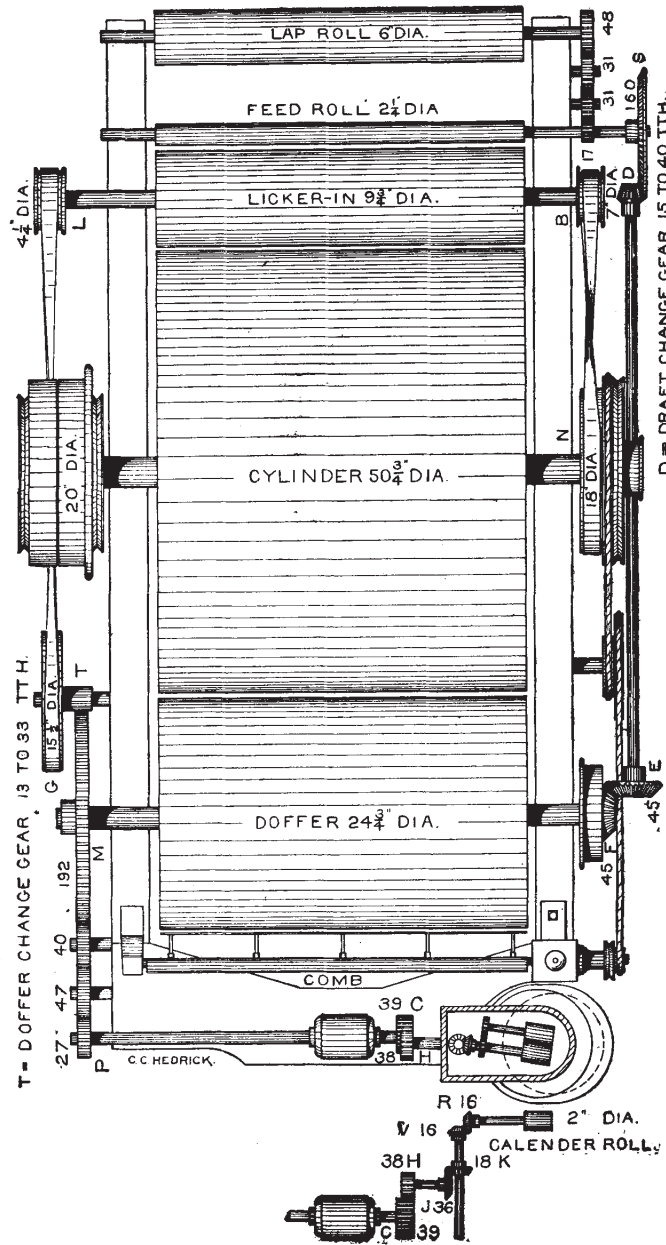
Diagram of Gearing. Whitin Machine Works Revolving Flat Card.
